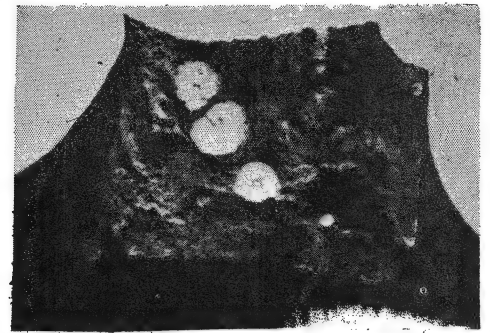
Underbead Crack in Hardened Zone During Fillet Welding x5
